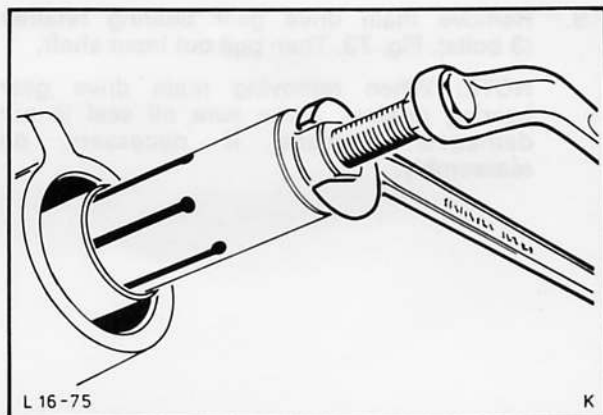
Extract extension housing bush with Special Tool No. 16-011
